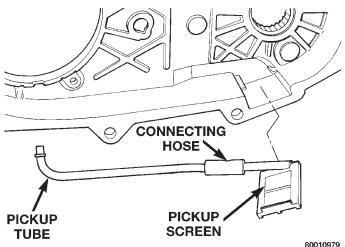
Oil Pickup Screen, Hose And Tube Removal
